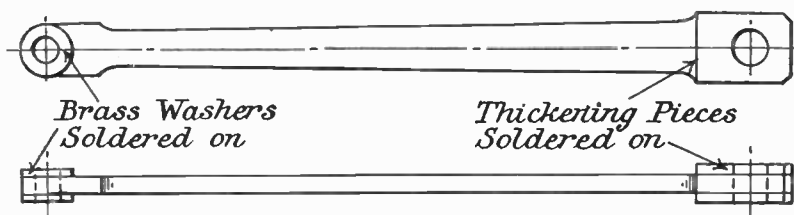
Connecting-rod for a model locomotive or horizontal engine
